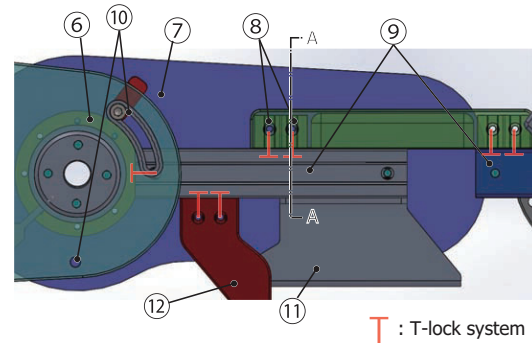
Link adjustment structure, where a T-lock with a wedge screw connects the upper and lower frame rigidly (numbers continue from Fig. 2): 6) joint part, 7) shoulder protector plate, 8) holes of wedge screw for frame-length adjustment, 9) aluminum frames, 10) mechanical stopper (upper is adjustable), 11) arm rest plate attached to user's arm via brace, 12) part connected to pneumatic cylinder rod.
